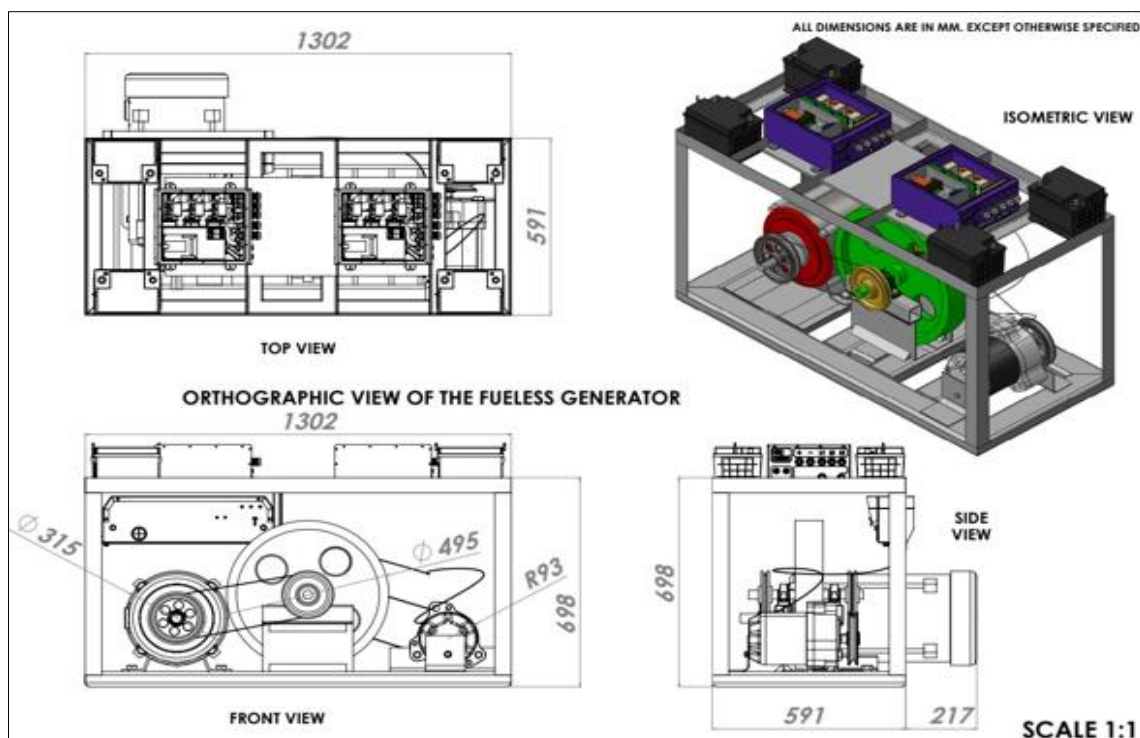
Orthographic projection views of the fuel-less generator system showing isometric, top, and front views with all dimensions in millimeters.
